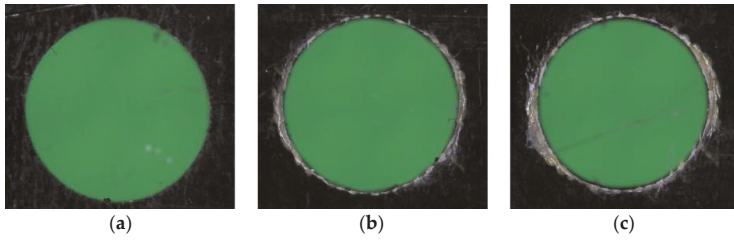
Pictures of (a) hole number 1, (b) hole number 30, and (c) hole number 60, made by tool T1.
